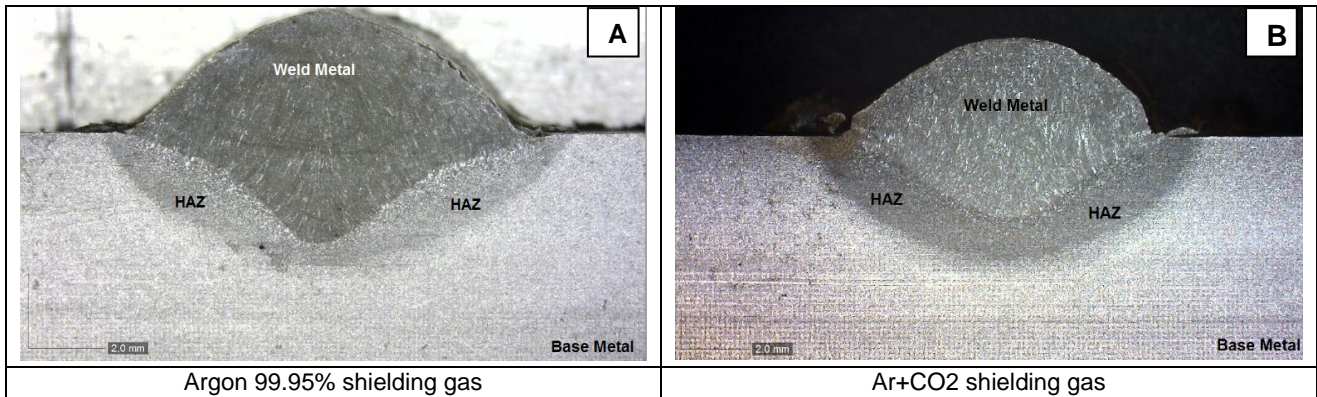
Shows the macrostructure of welding in Ar and Ar+CO₂ shielding gas
